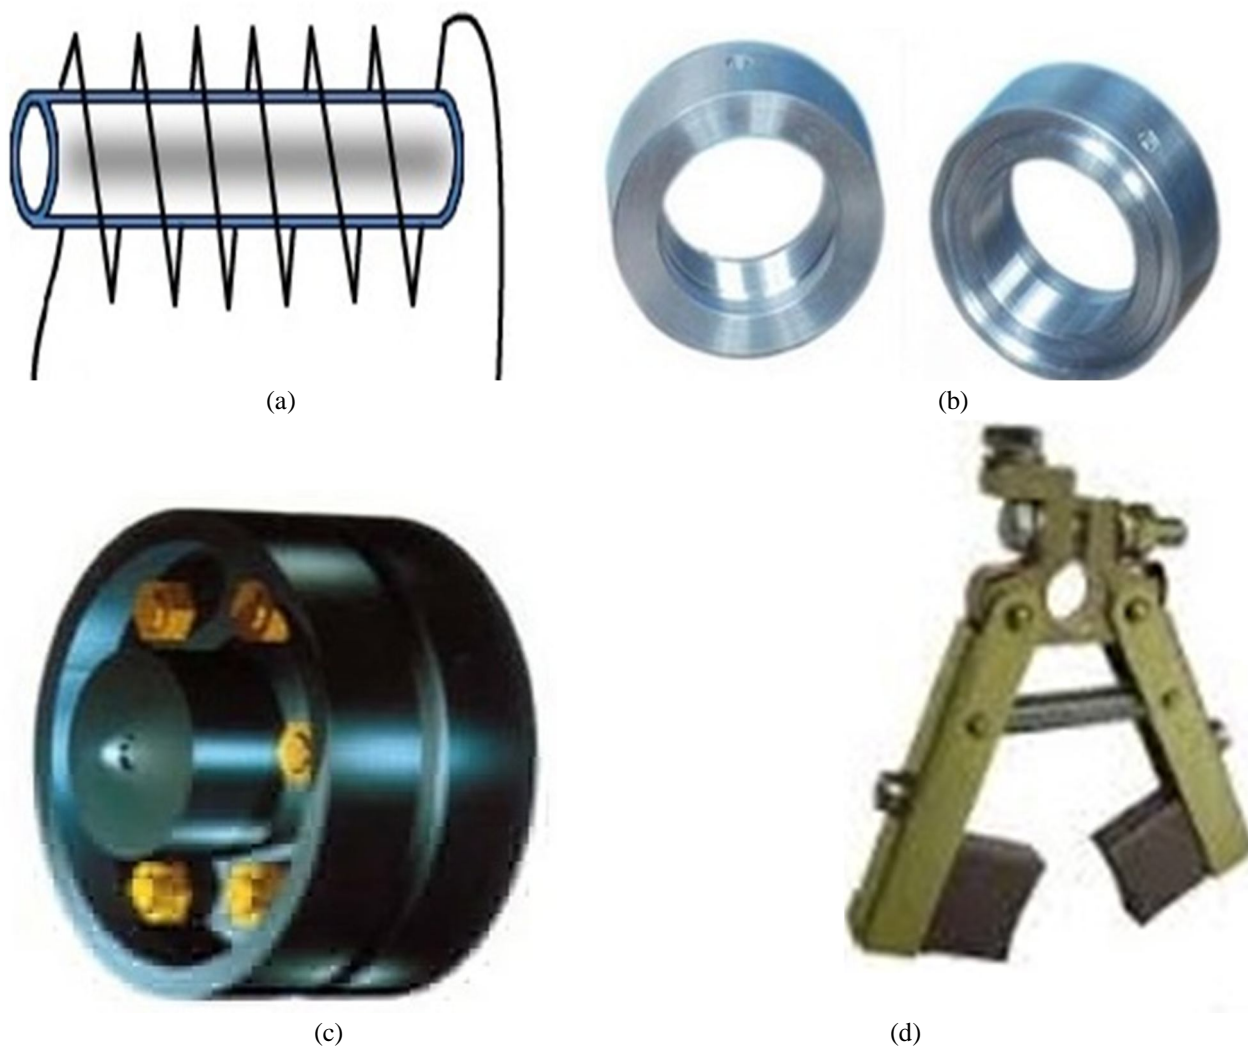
Pictorial view (a) Electromagnet (b) Pictorial view of Bush (c) Slip Ring (d) Carbons
